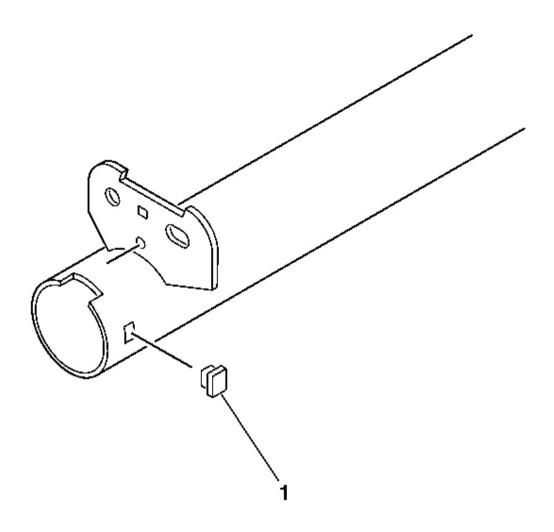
Jacket Hole Plug Courtesy of GENERAL MOTORS CORP.
